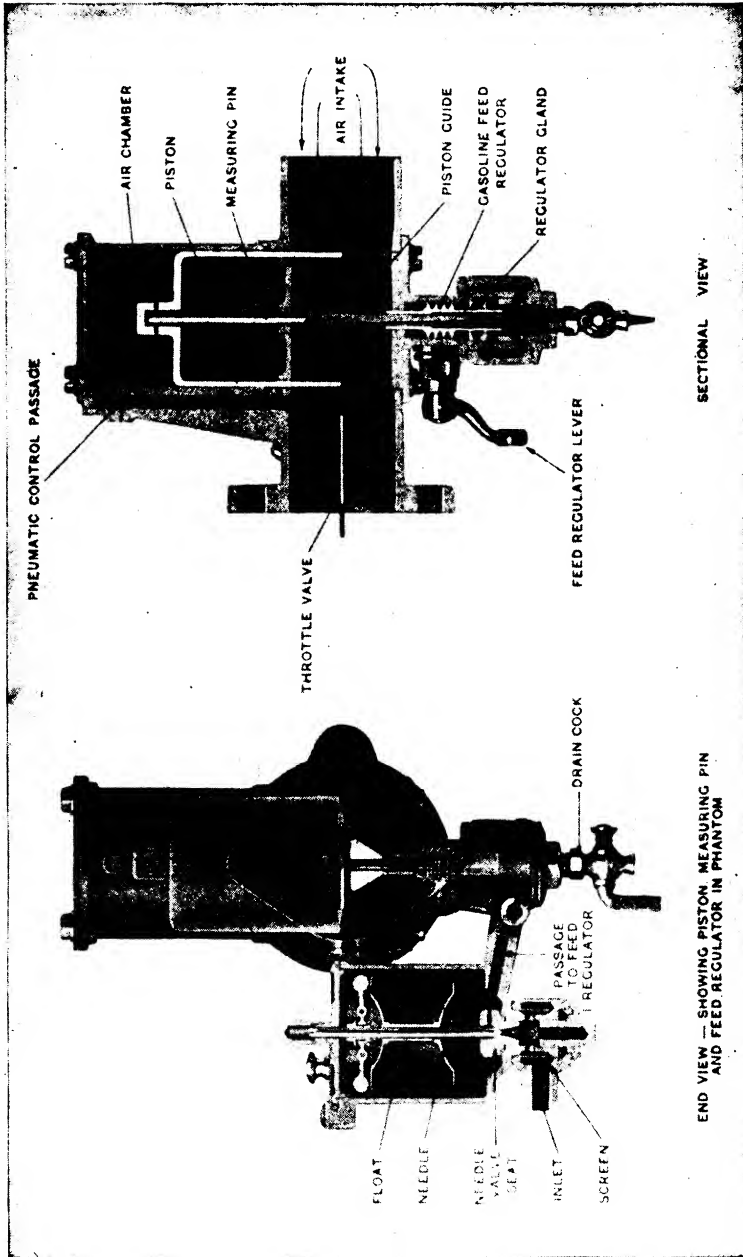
Front and Side View of the Hudson and Essex Carburetor
